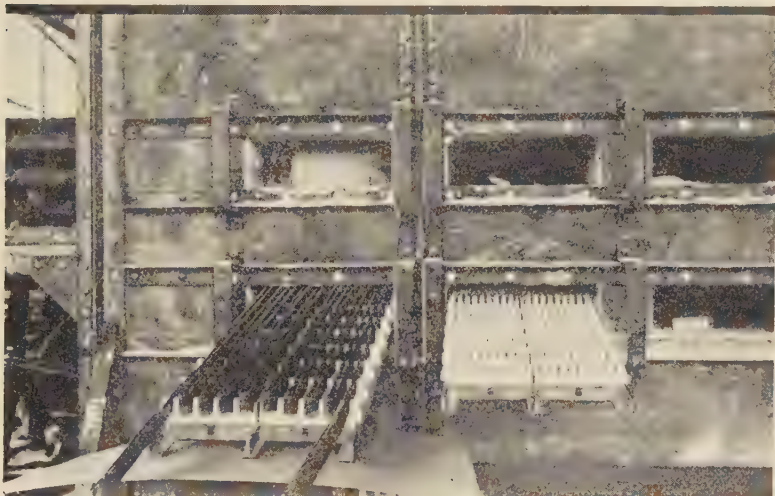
Method of withdrawing resistor frame through side of furnace.
